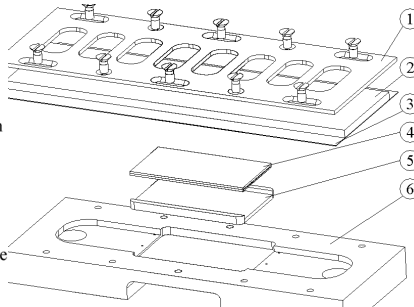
Manifold detail. Sample (4) and Shim (5) fill cavity in manifold block (6). Sealing is provided by gasket paper (3) clamped between the glass slide (2), and manifold block (6) by a cover plate (1).
